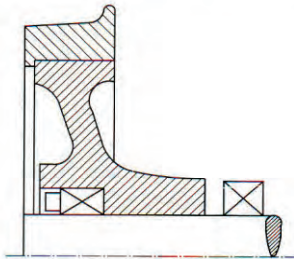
Track wheel mounted using GSN 7012 locking assembly.
